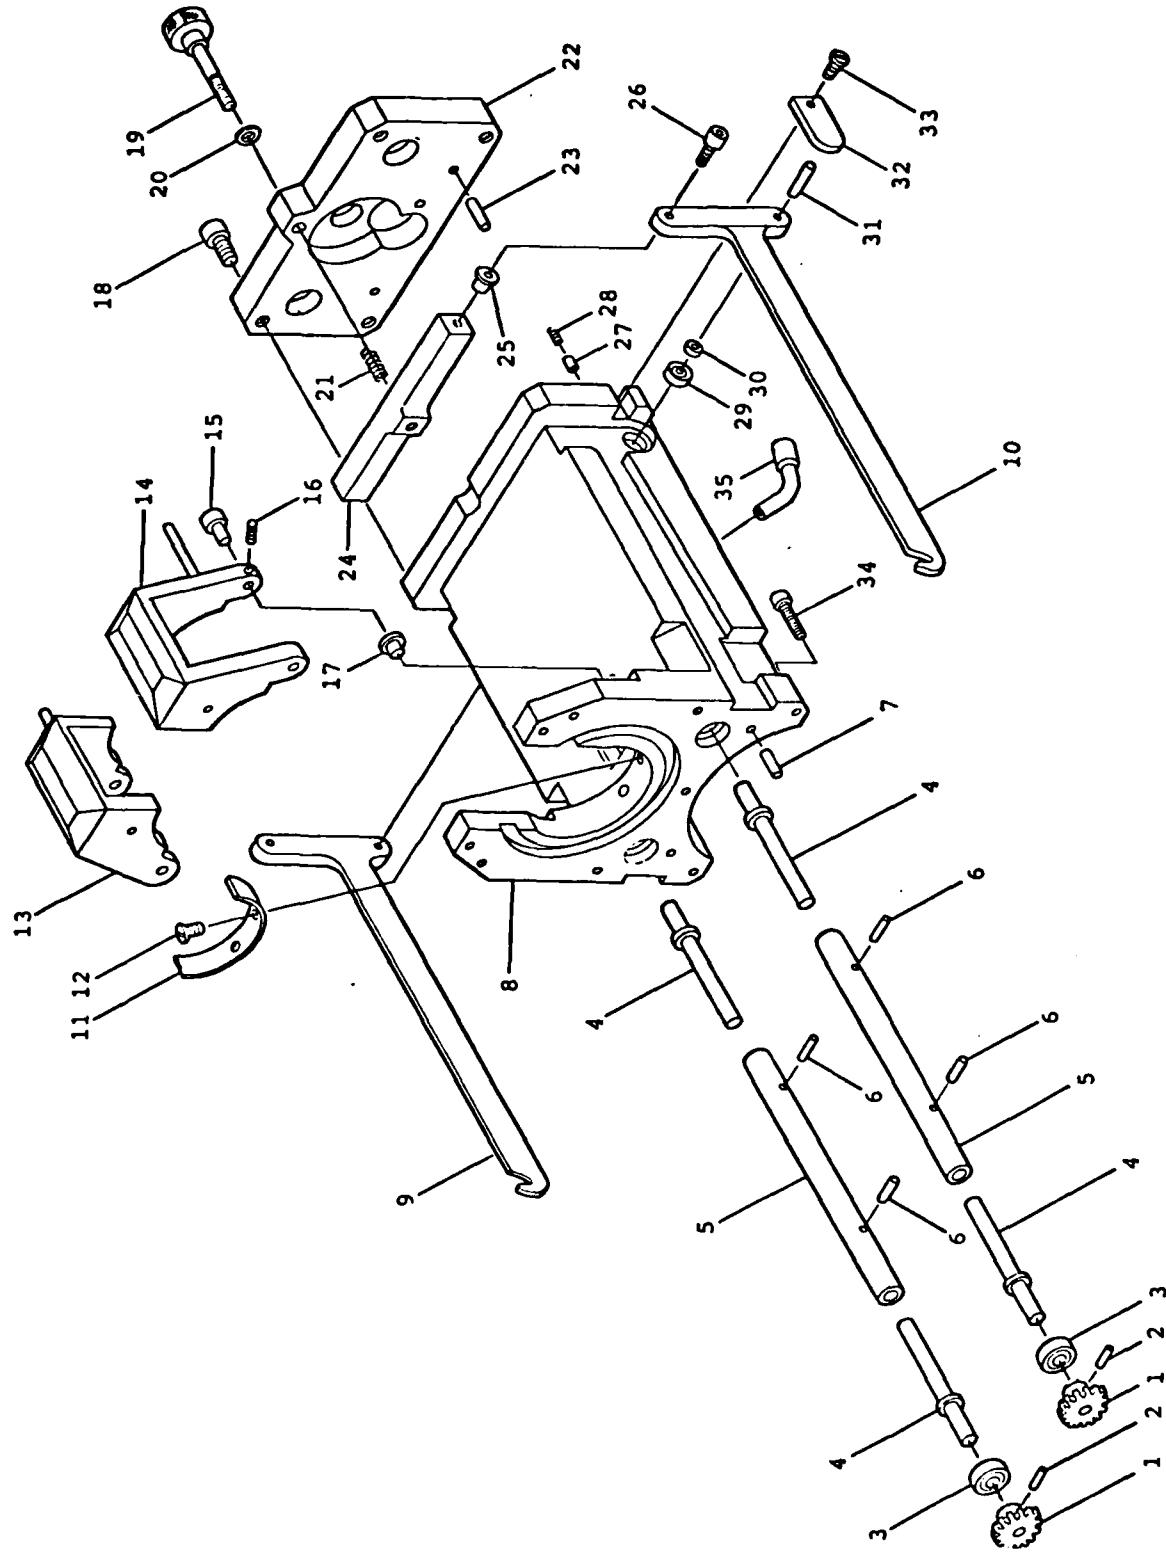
Upper Housing Assembly Special Open End Weld Head 2124
